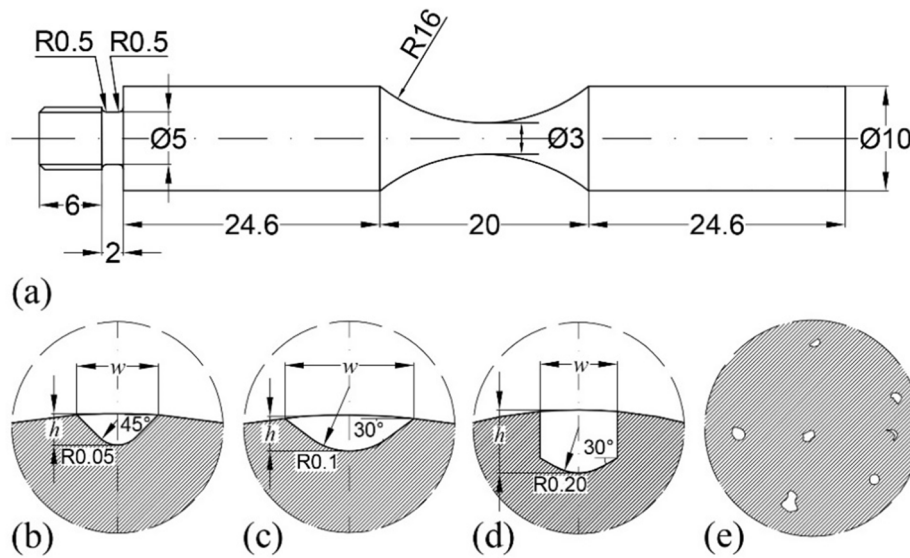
Sketch maps of specimen and defect. (a): Fatigue specimen (in mm); (b)-(d) Cross section of defect-A, defect-B and defect-C perpendicular to the specimen axis. (e) AM defect of the material.
